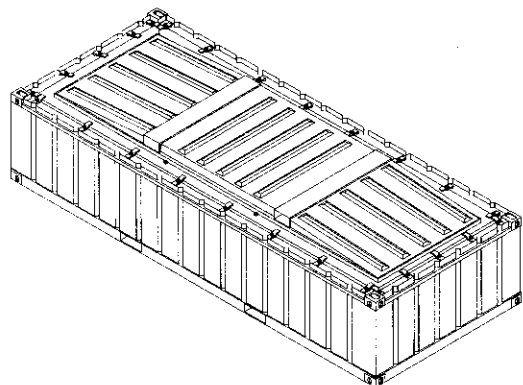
Top opening disposal container (6 m × 2.4 m × 1.2 m).
